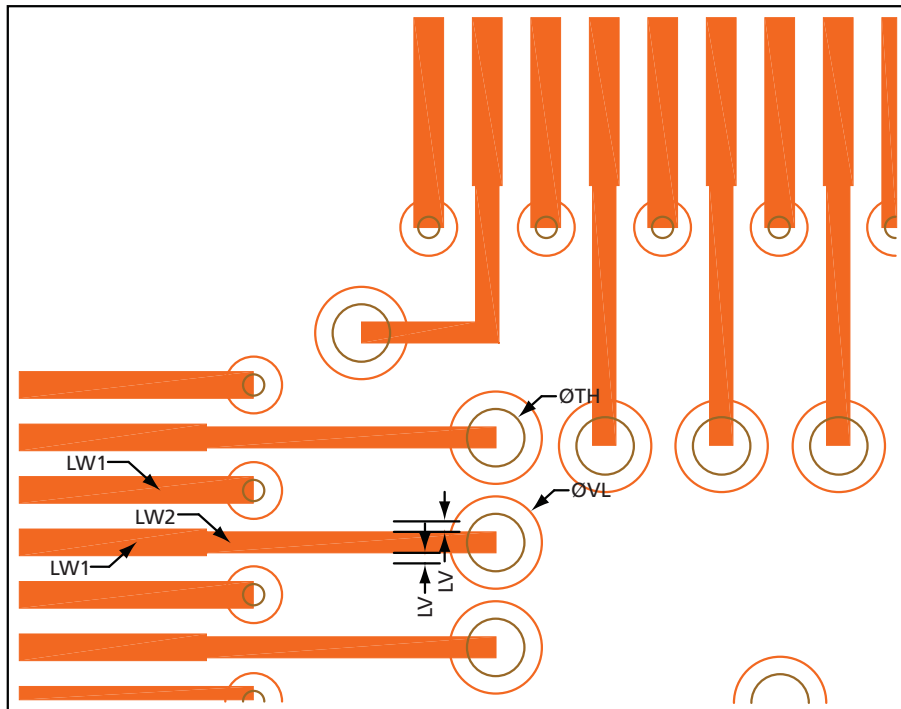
• Soldered Pads for QFN Packages, Reduced Thermal Pad (PCB lower layer)
